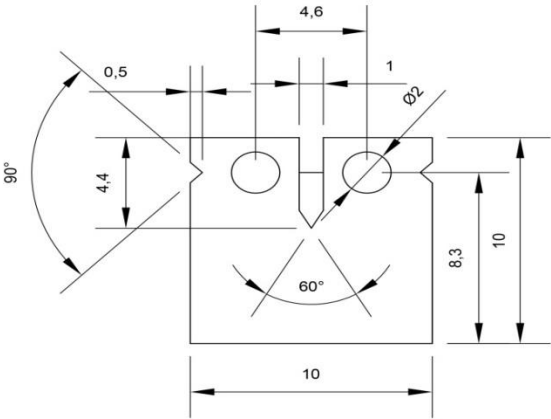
The geometry and dimensions of MCT specimen used in [63].
